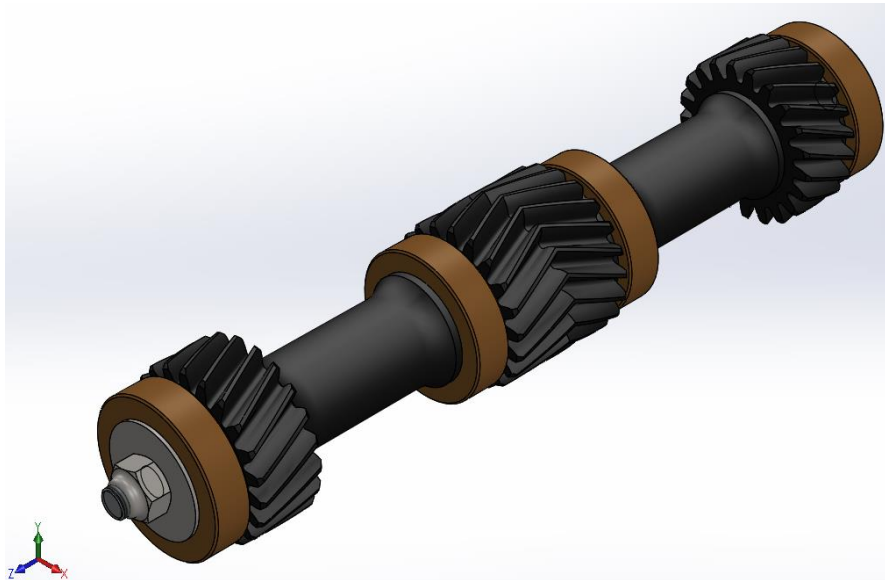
Assembly of the planetary gear, obtained from the CAD of the reduction gear
